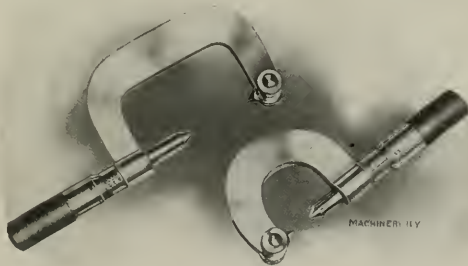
Screw-thread Caliper made in Hand Micrometer Style.
